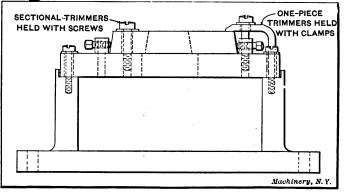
Showing Method of Mounting a Trimming Die on the Bolster and Shoe
